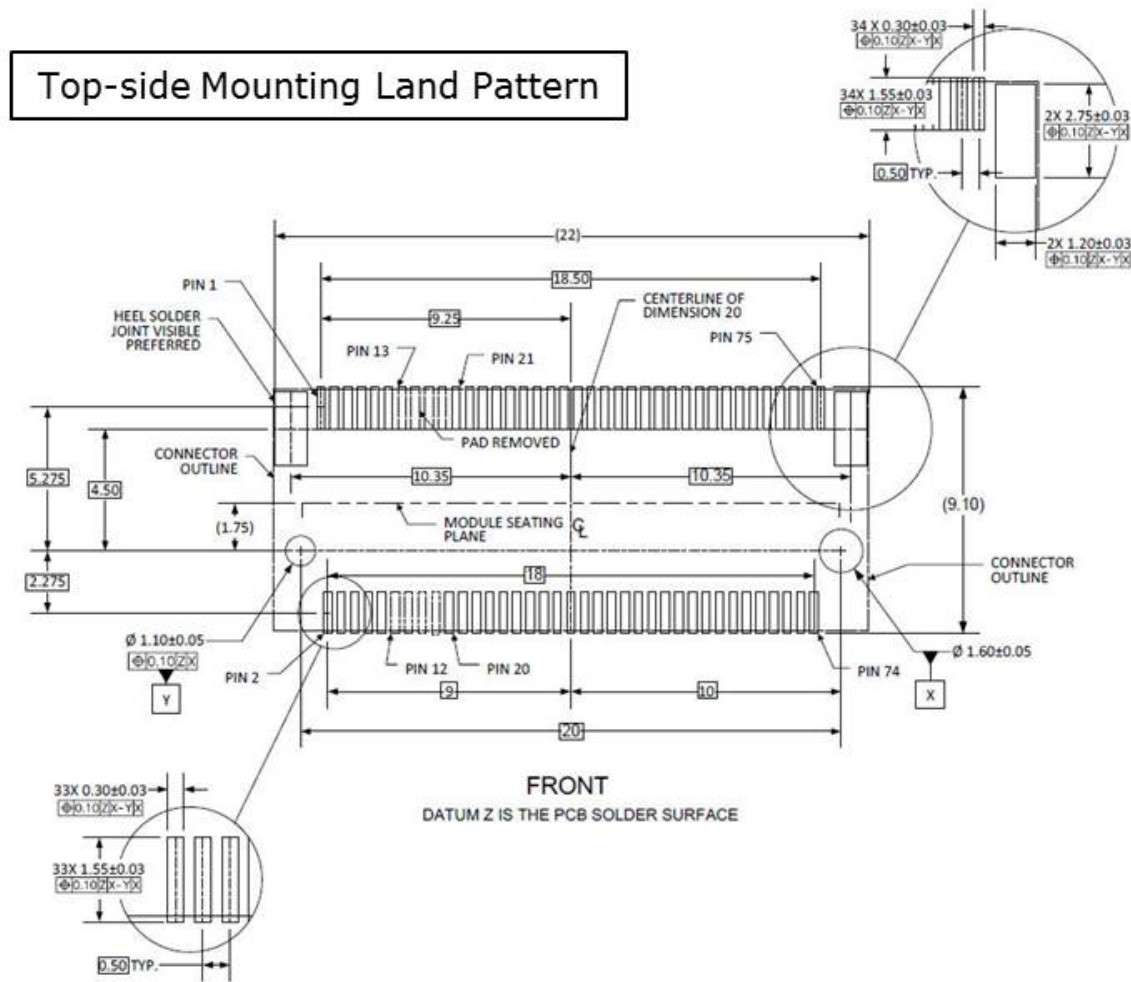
WWAN Card Type 3042 Top-Side Mounting Land Pattern
